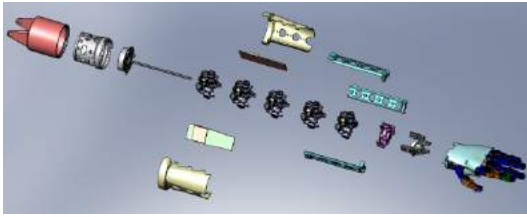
Extrinsic hand showing Cobot Module of 5 pucks each with 3 CVTs.
